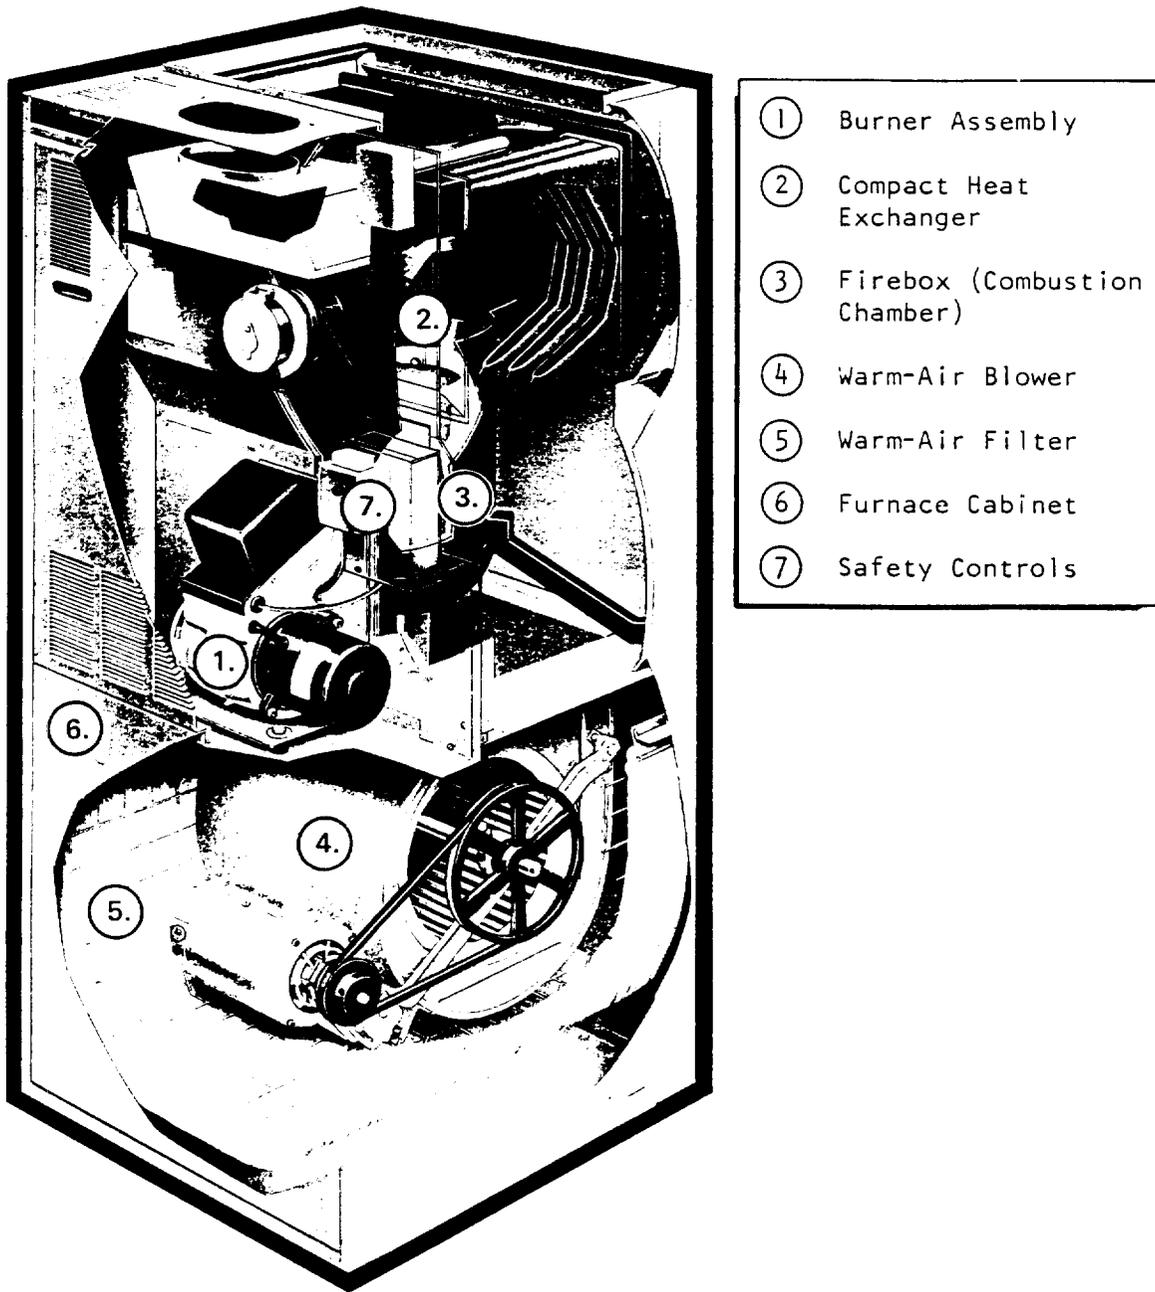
Cutaway Drawing of the Stock Lennox Model 011-140 Furnace
